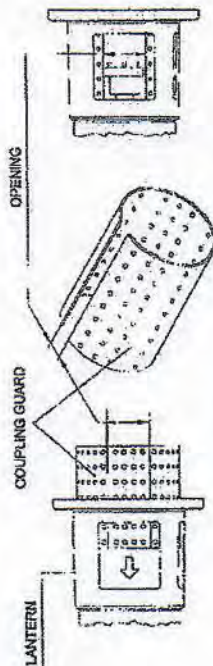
PREPARING TO ASSEMBLE THE MONOBLOCK DESIGN
